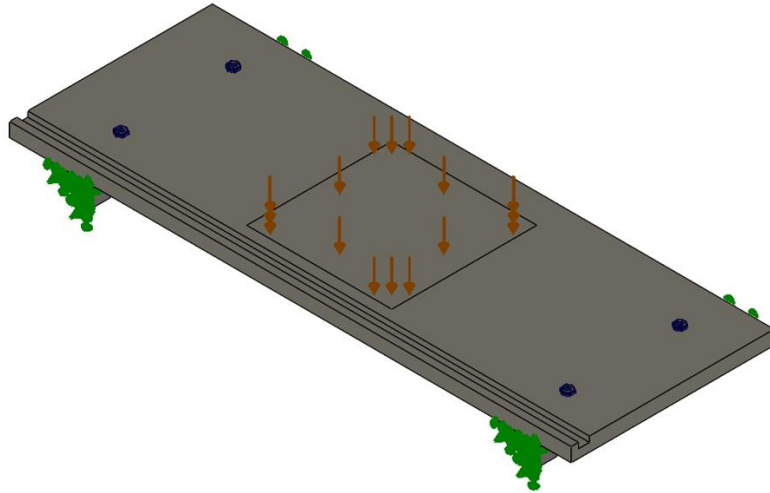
FEA of Treadmill Deck Showing Load and Fixture Locations
